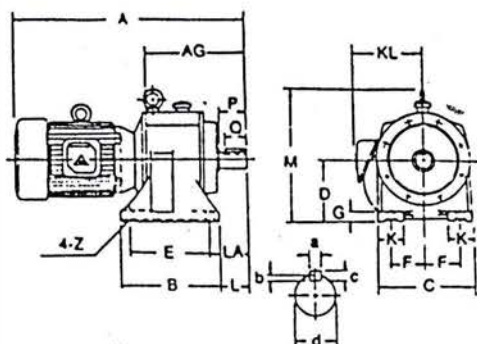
TFA Type (4P-3.7kw • 6P-2.2kw and below)
